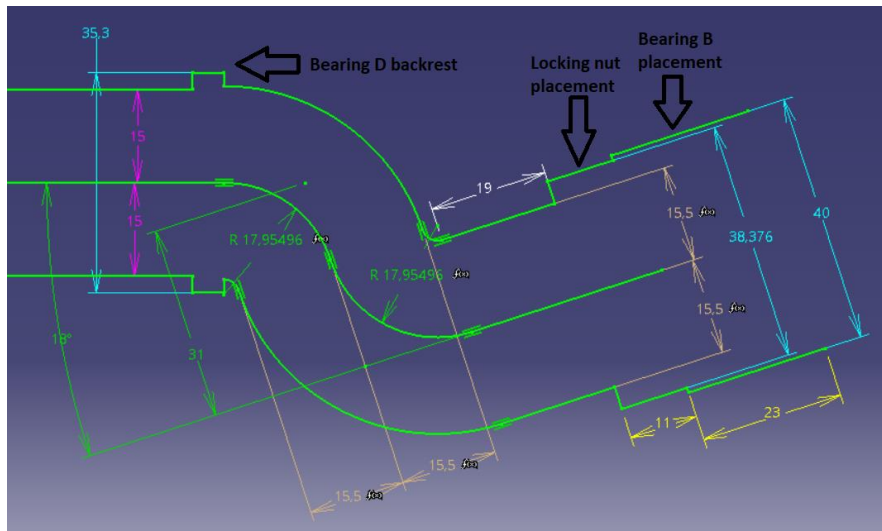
Crankshaft and bearing specifications for bearing passage simulation
